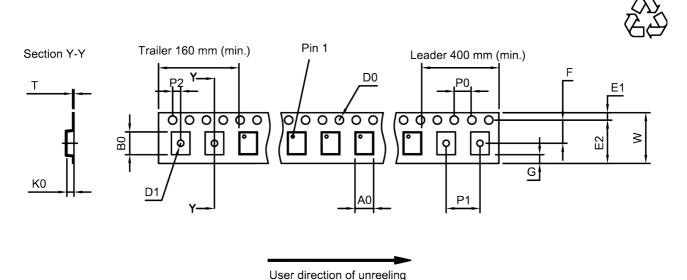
Drawing of tape (first-angle projection) with tape dimensions according to Table 1.
